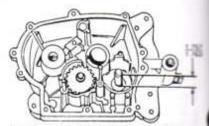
On Models HM80, VM80, HM100 and VM100, belancer gear shafts must be pressed in to cover or engine base so a distance of 1.753 1.763 inches (44.628-44.780 mm) exists between shaft bore boss and edge of step cut as shown.
